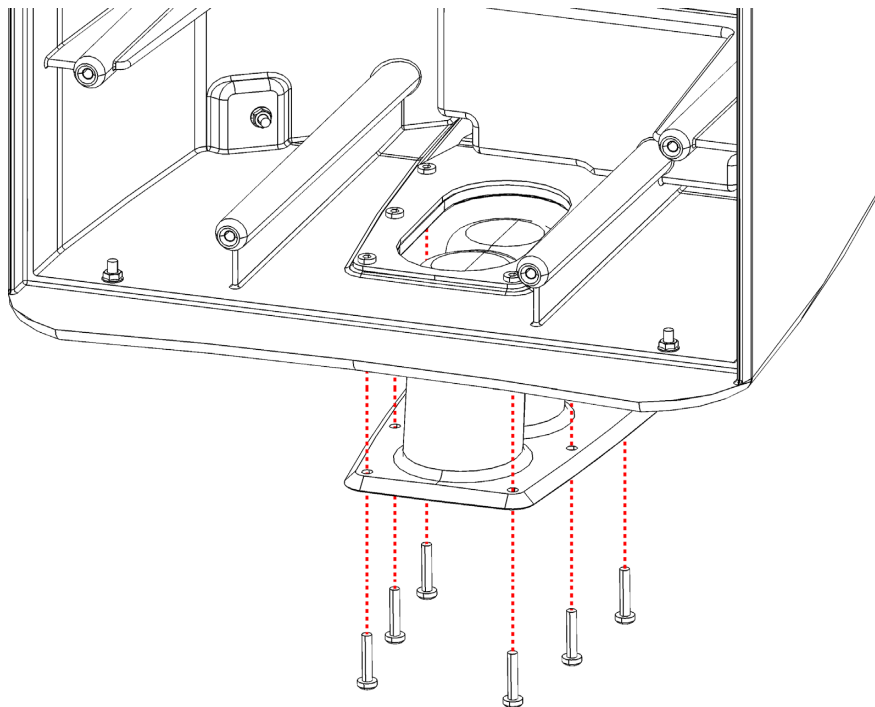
Pole cup piece and mounting plate inside the enclosure
